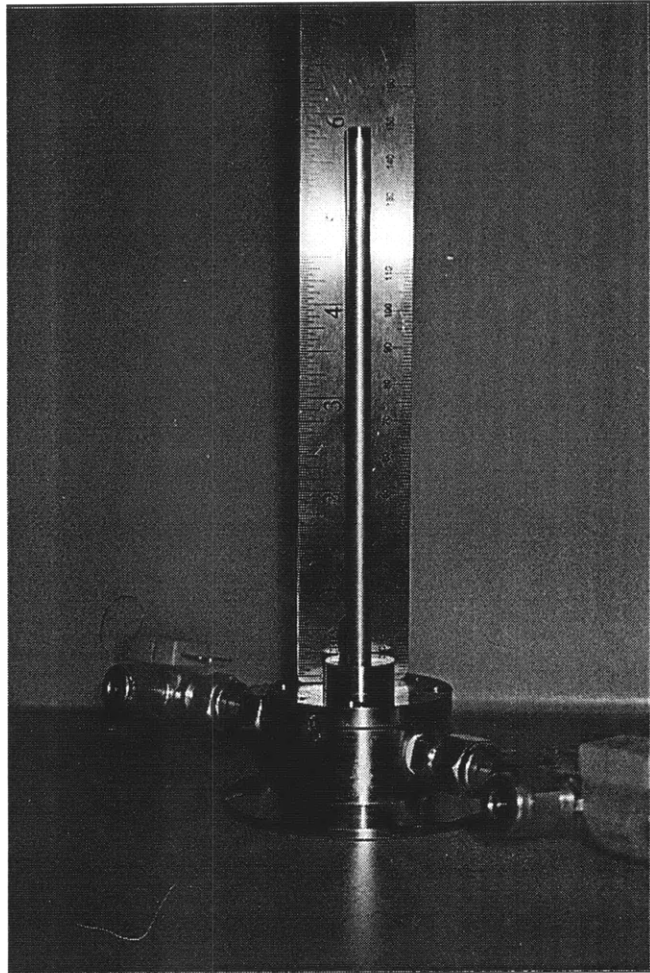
a. Picture of the needle tube Prototype II. Shown from top down are: outer tube, shoulder, and two base pieces. The two thermocouples are led out of the coolant inlet and outlet.
